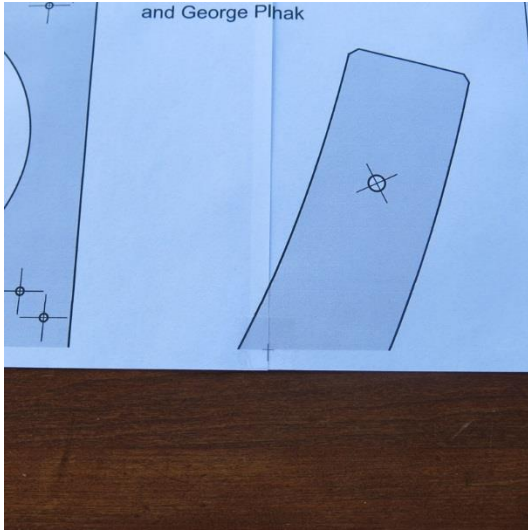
USING A PAPER CUTTER TO TRIM SHEETS ON ALTERNATE EDGES
